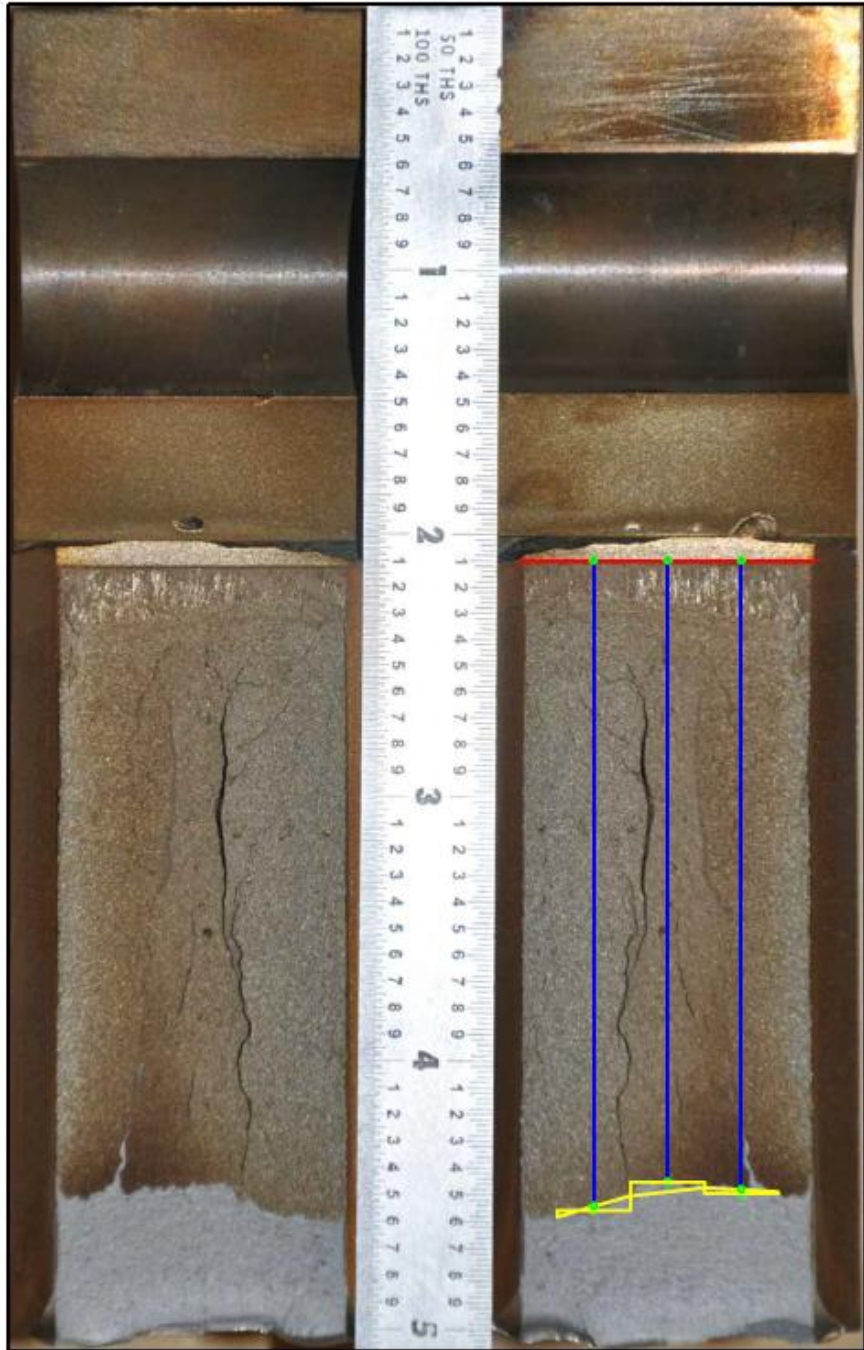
Specimen E19a Fracture Surface
